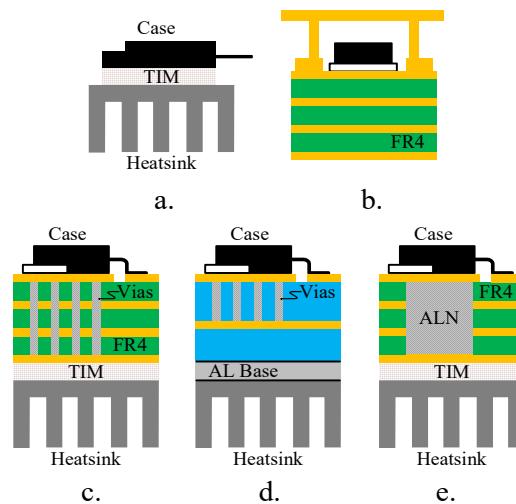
Heat management strategies for, (a) Through hole device, and surface mount device (b) Top side heat sink, (c) Thermal Via, (d) Metal core PCB, (e) AlN ceramic inlay
